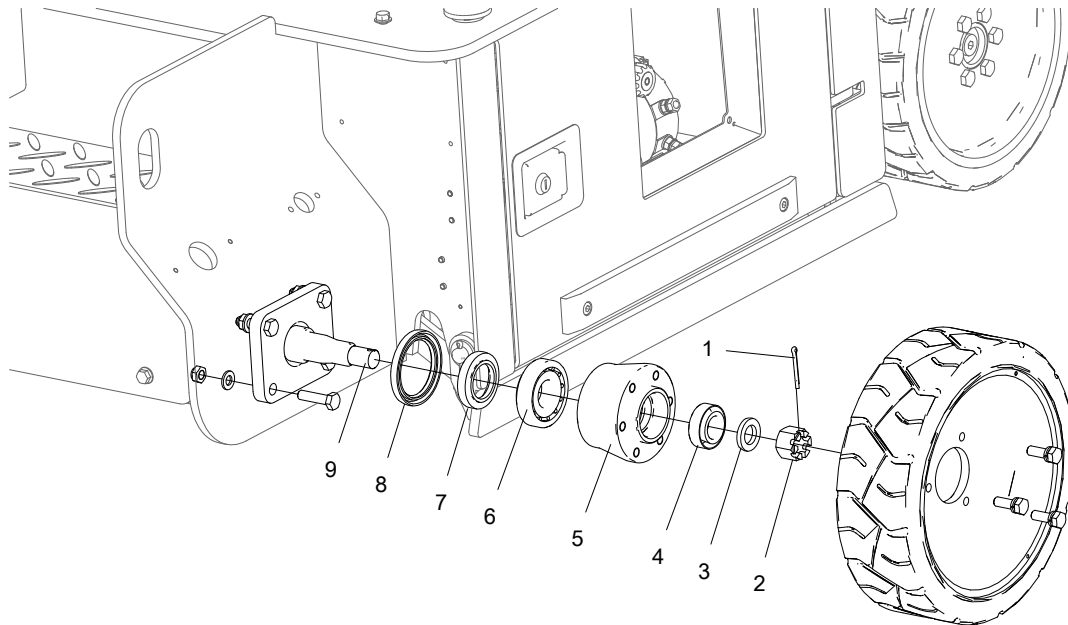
Diagram – Installation of the rear wheel bearing housing
